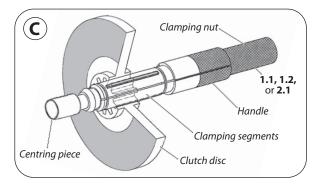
Mount the clutch pressure plate, then remove centring tool.
